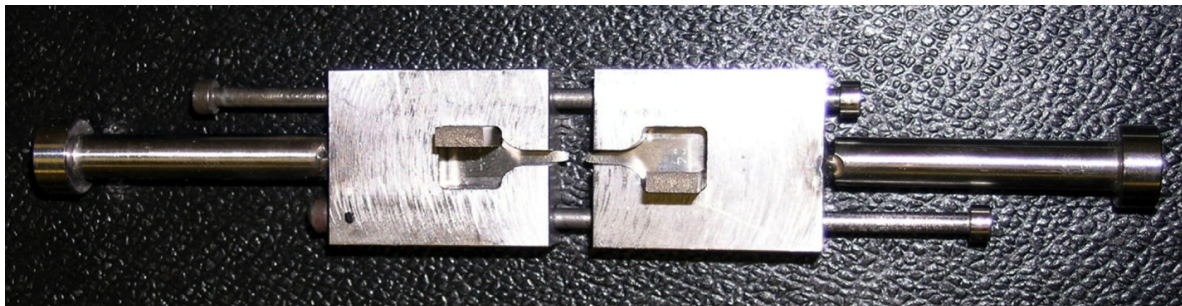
Picture of shoulder-loading specimen holder designed to test SS-3 tensile specimens.
